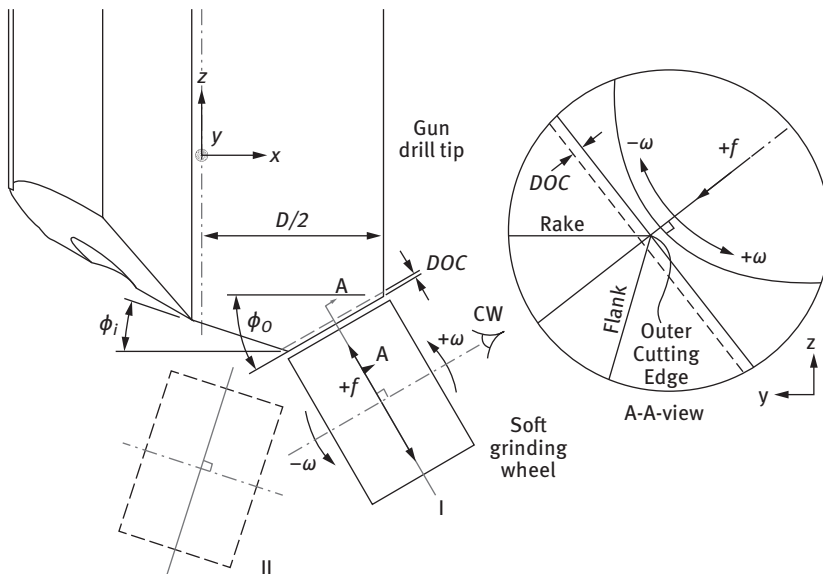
Illustration of cutting edge preparation using soft grinding wheel. (I) Outer cutting edge preparation and (II) inner cutting edge preparation.
